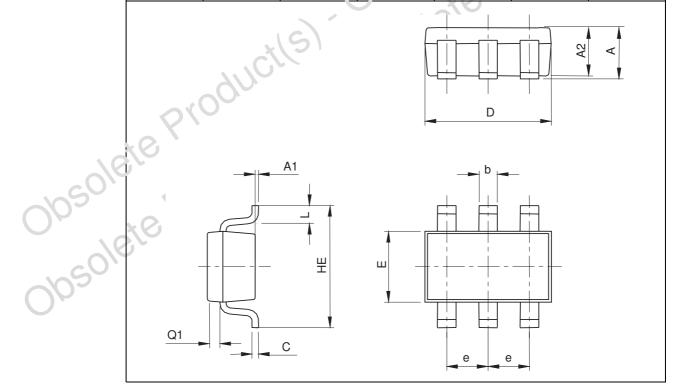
SC70-6 (or SOT323-6) package footprint (in millimeters)
